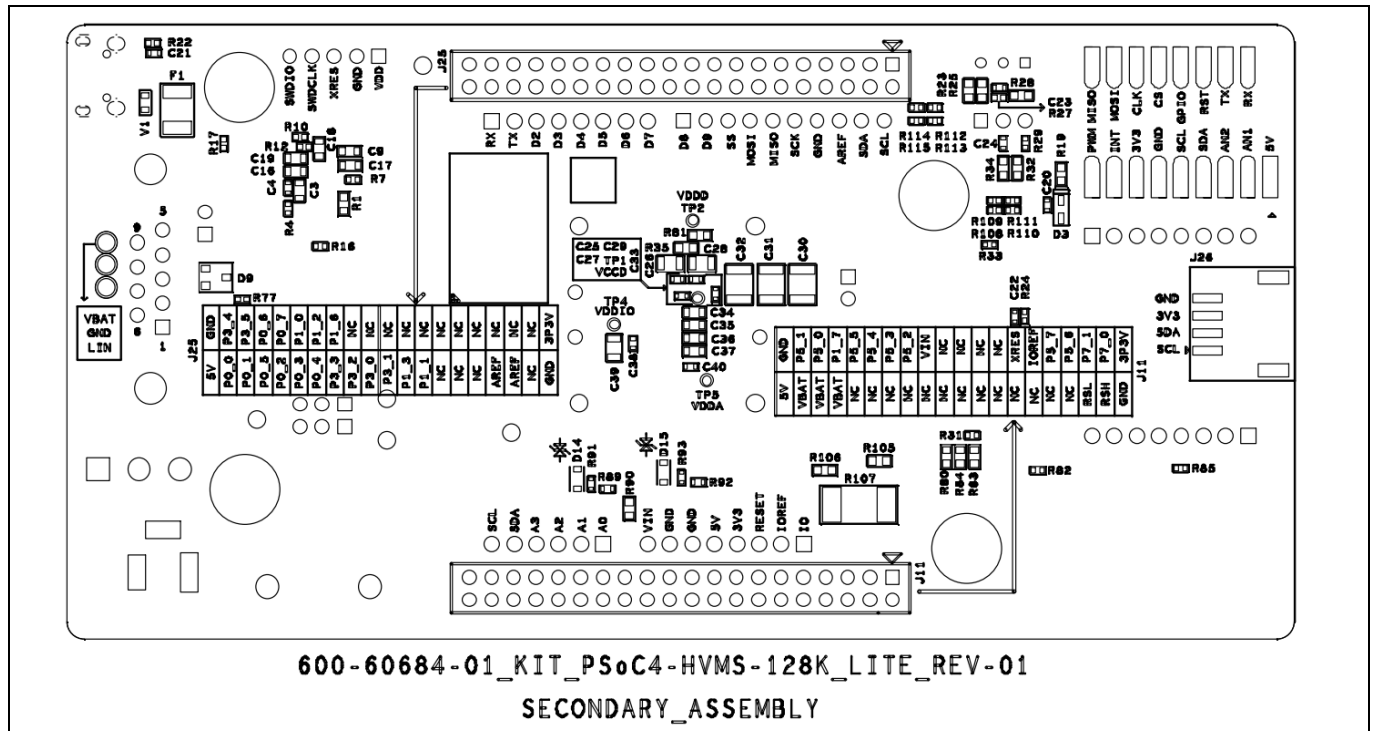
KIT\_PSoC4-HVMS-128K\_LITE kit assembly drawing - bottom view
